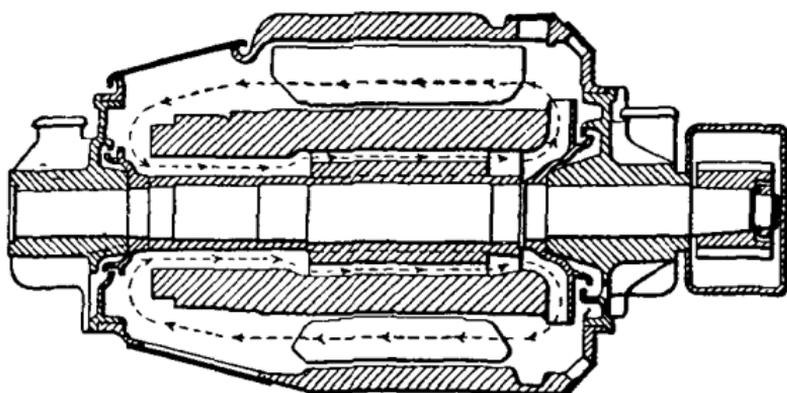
Internal ventilation—armature with fan—longitudinal vent ducts—air inlet and outlets closed.
